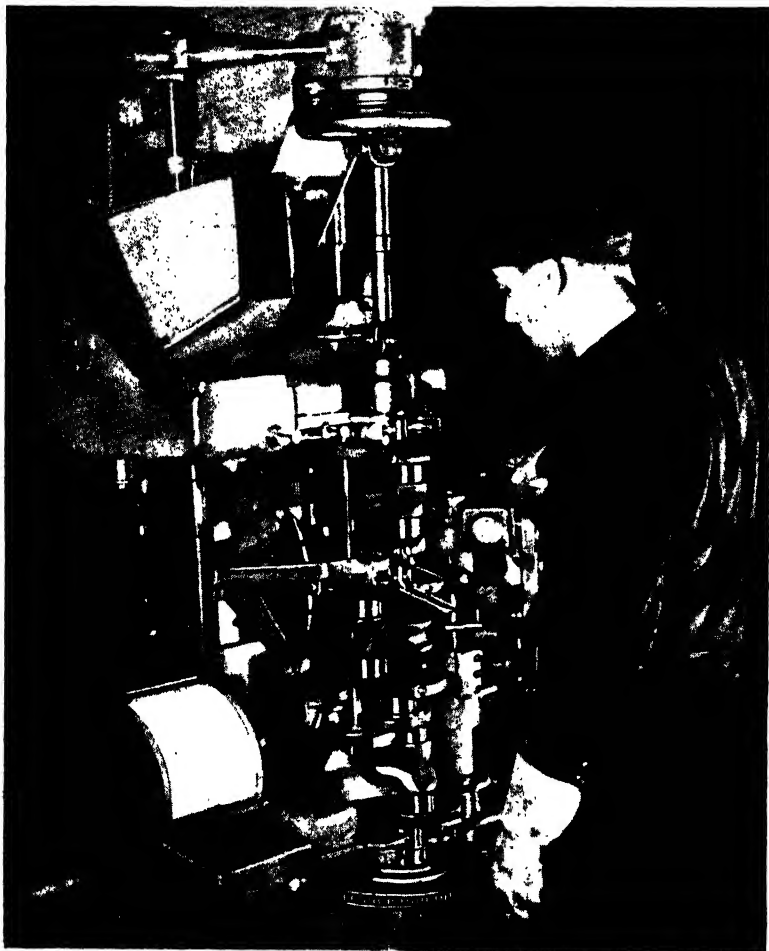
Arbor Press Arranged for Checking the Radius of Steel-backed Crankshaft Bushings Under a Pressure Corresponding to that Imposed in Service
